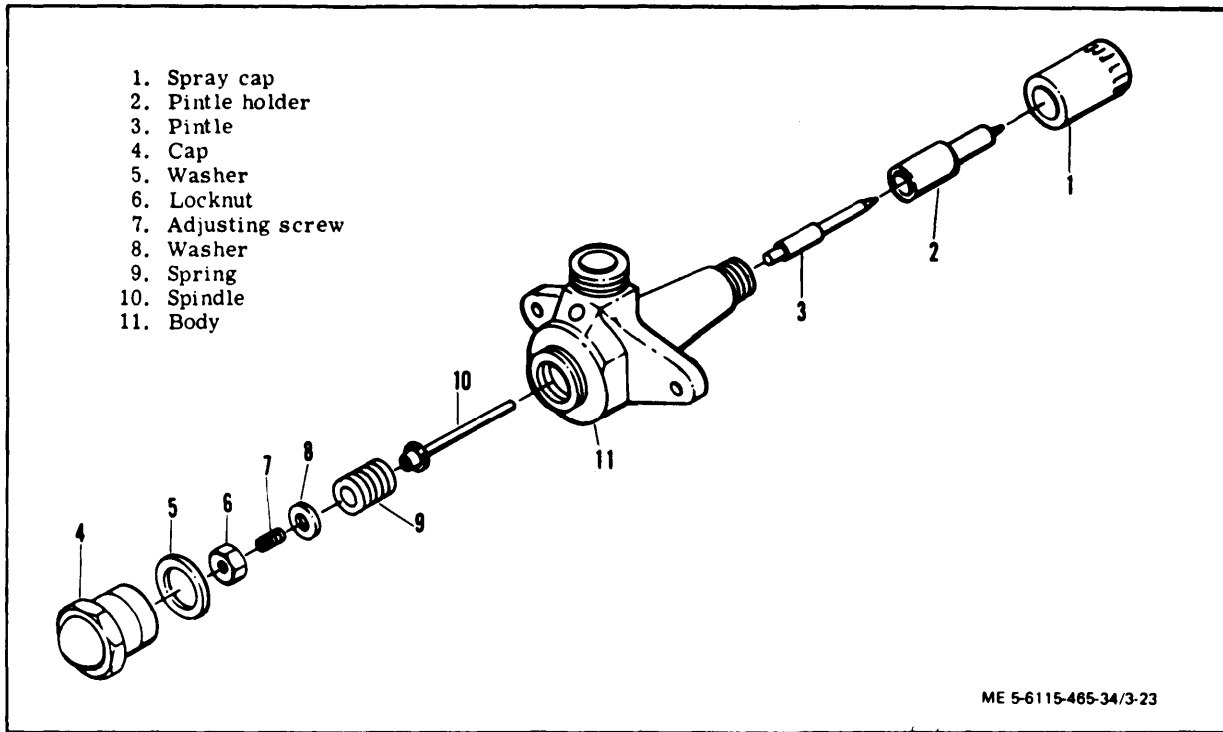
Fuel Injection Nozzle Holder, Exploded View
